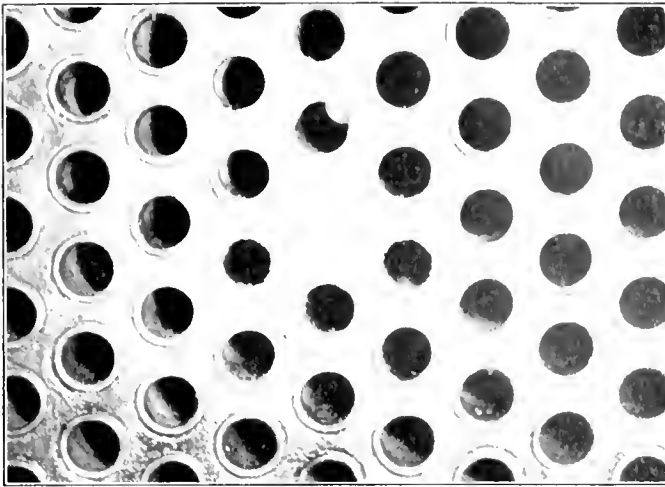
Three Tubes Welded in Flue Sheet.
